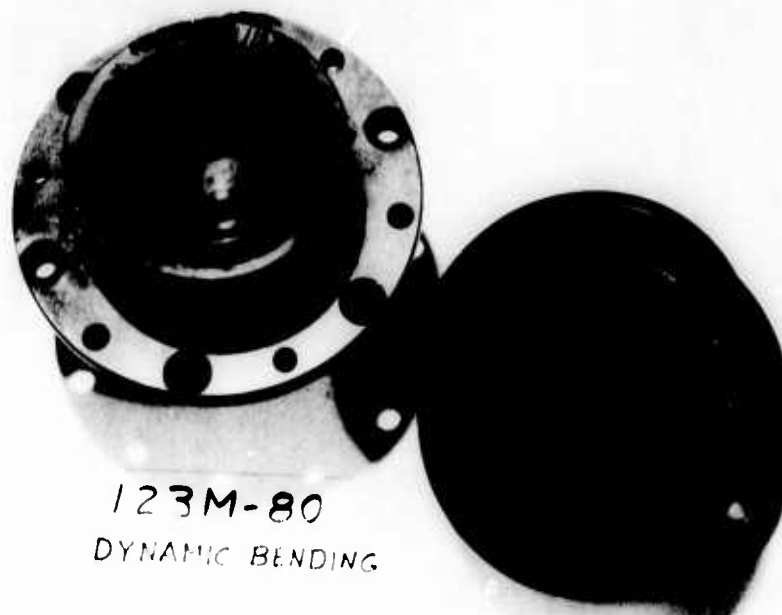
Valve Sections After Removal From Test Fixture Following Bending Test.
